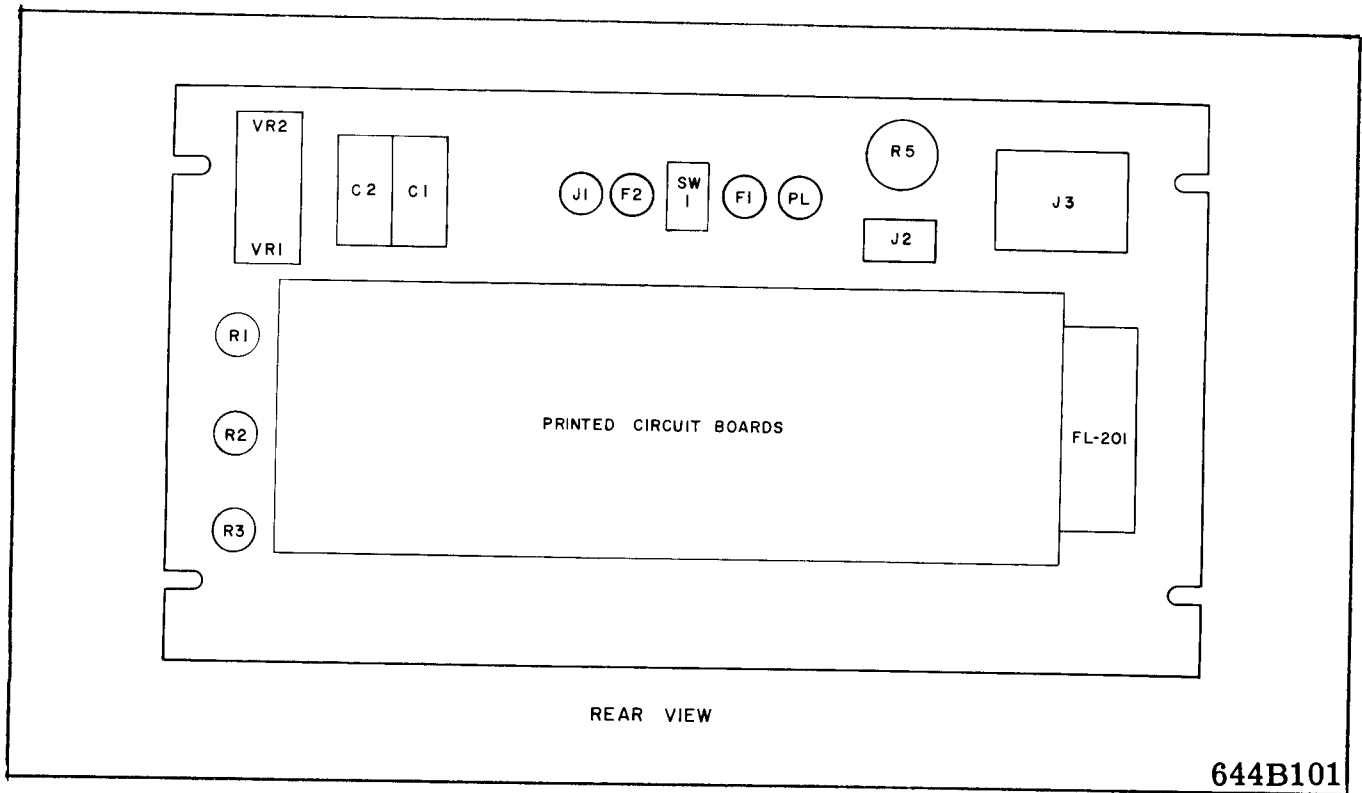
Component Locations on the Type TCF Receiver Pane.
